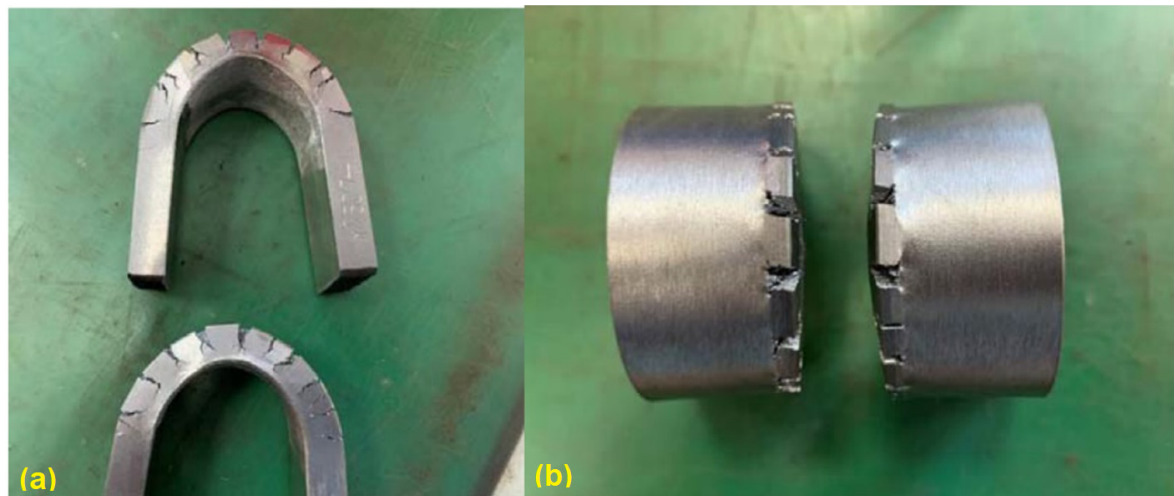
Manual TIG welded sample after side bending: side view (a) and top view (b).
